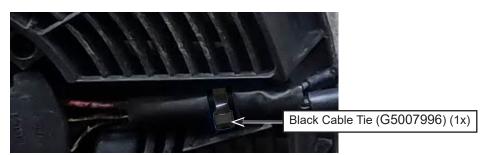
Black Cable Tie Securing the Wiring at Fan Side
